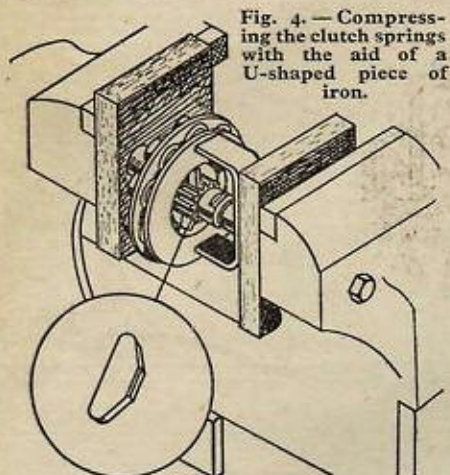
Compressing the clutch springs with the aid of a U-shaped piece of iron.
